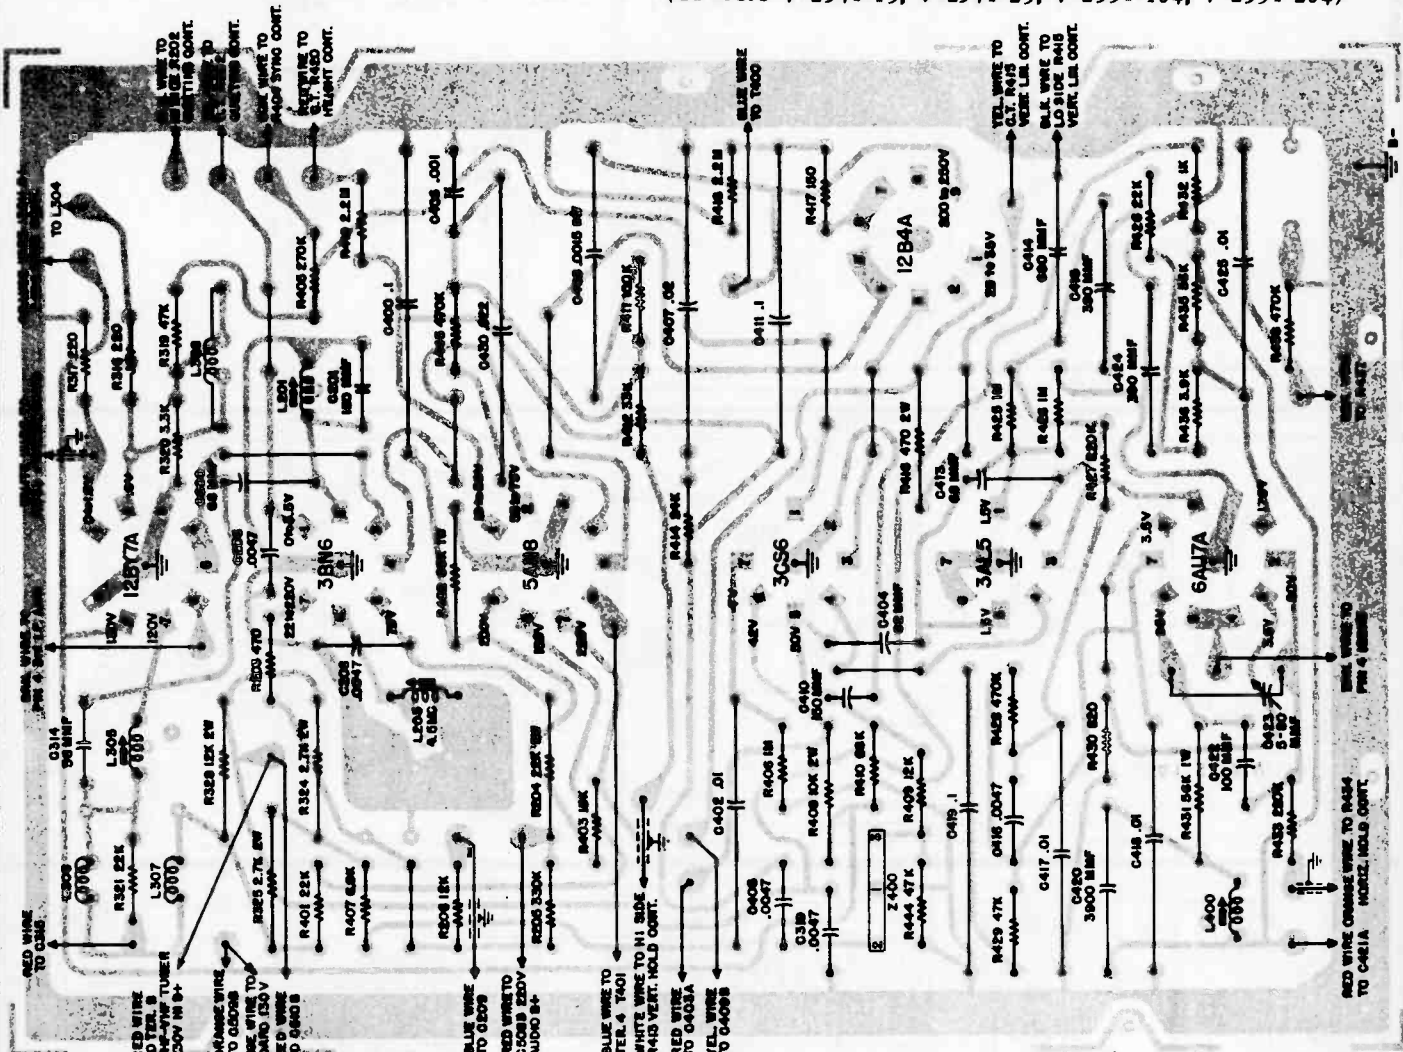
Bottom View of Sweep Printed Board Showing Top Components Symbolically
